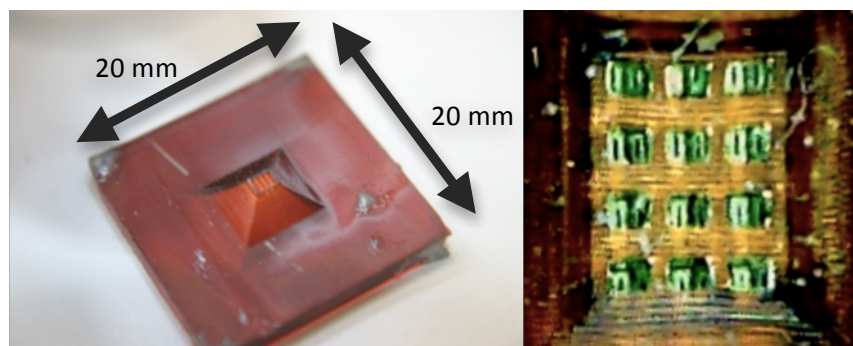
a) Deposition mask with dimensions b) Deposition mask aligned under microscope
